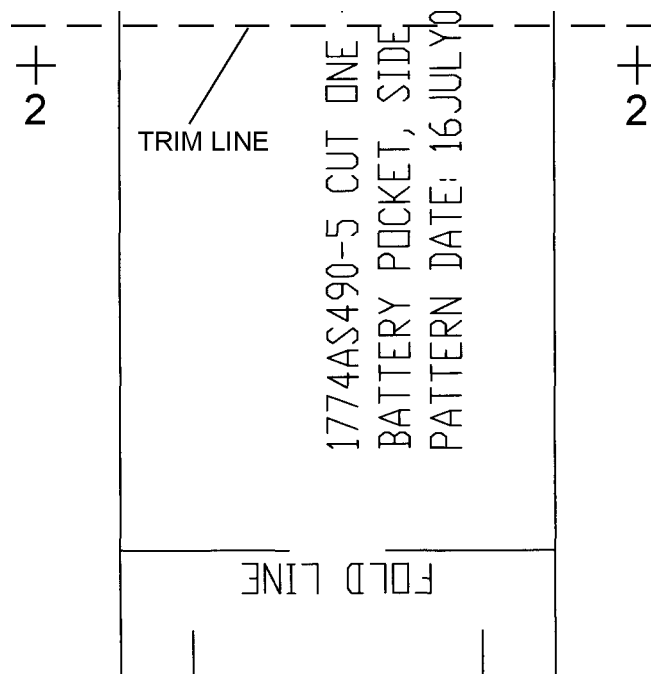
Z. Battery Pocket Side Panel Pattern (Sheet 3 of 3)
